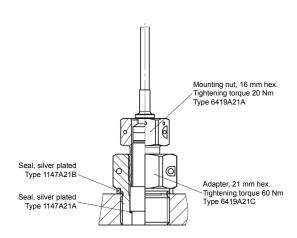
Installation with adapter Type 6419A21C, mounting nut Type 6419A21A, and seal Type 1147A21A and 1147A21B
